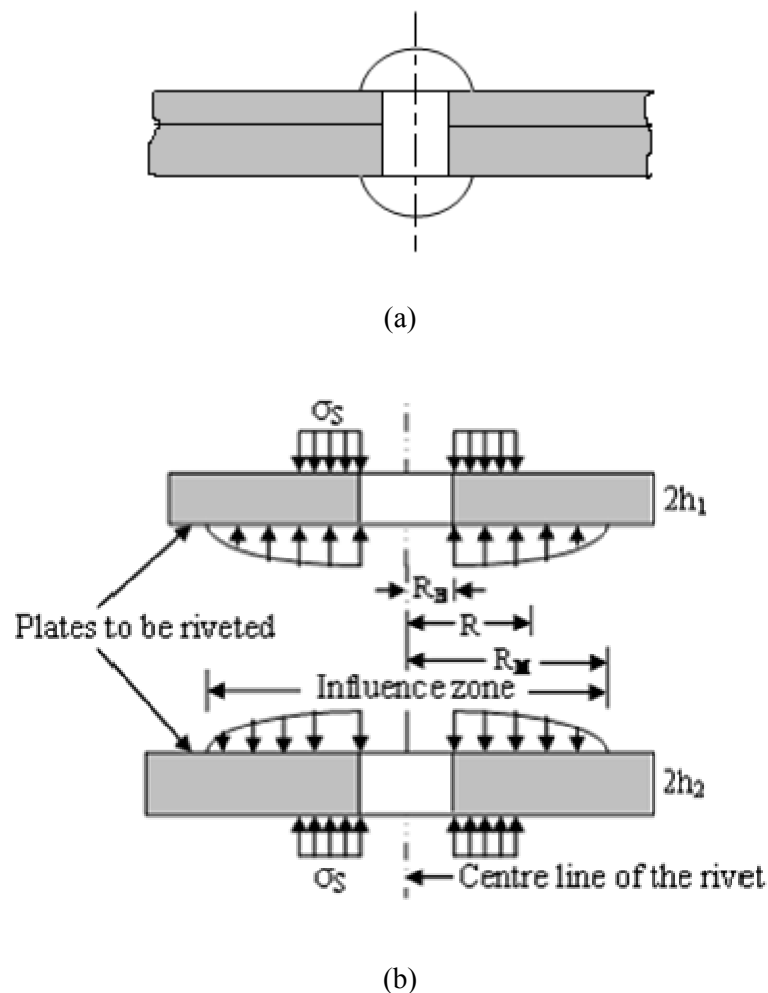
(a) Plates clamped by a rivet (b) Free body diagram of a riveted joint showing the influence zone
